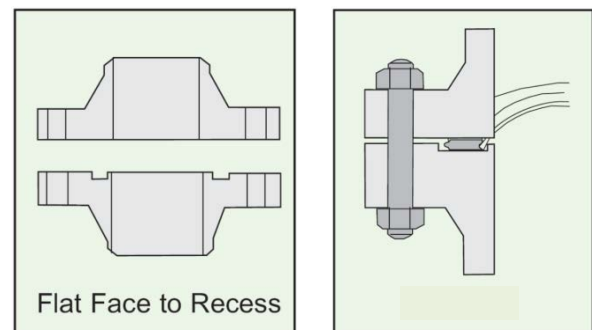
“Hard” joint, flat face to recess flanges with a windings-only spiral wound gasket [2]
